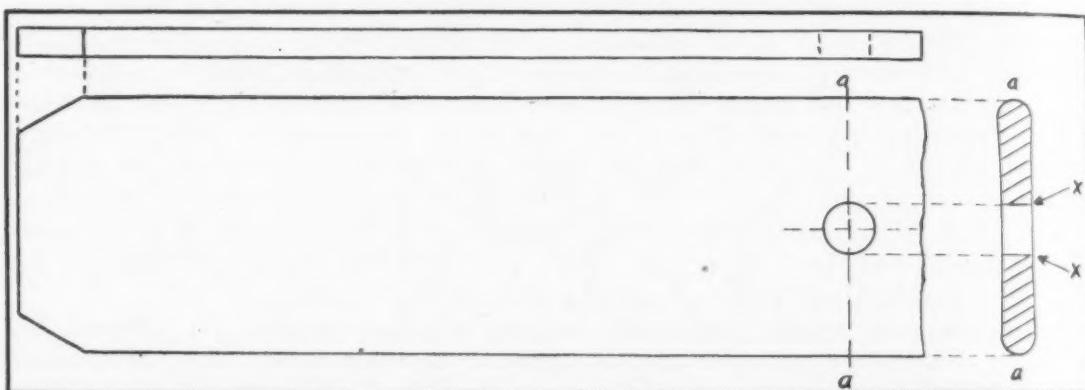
Sketch of Automobile Spring Leaf Used in Making Tests
